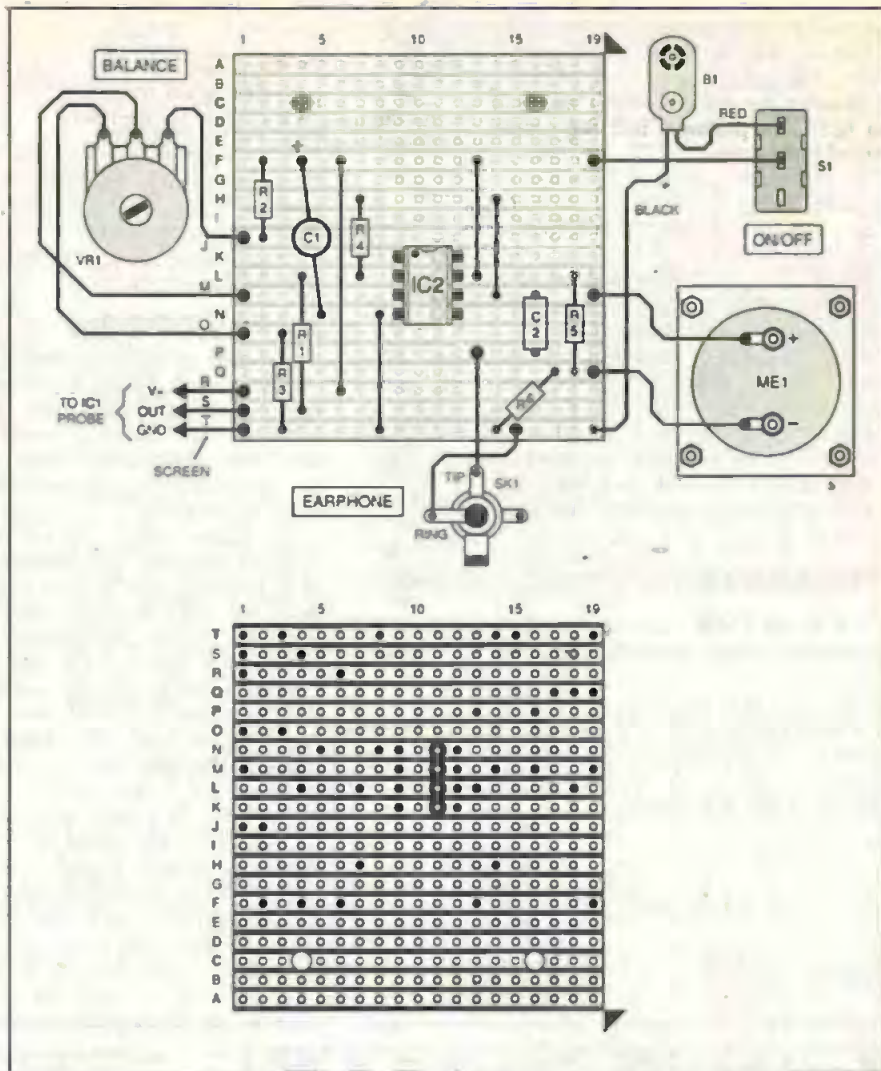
Stripboard component layout interwiring and details for breaks required in the underside copper tracks.
